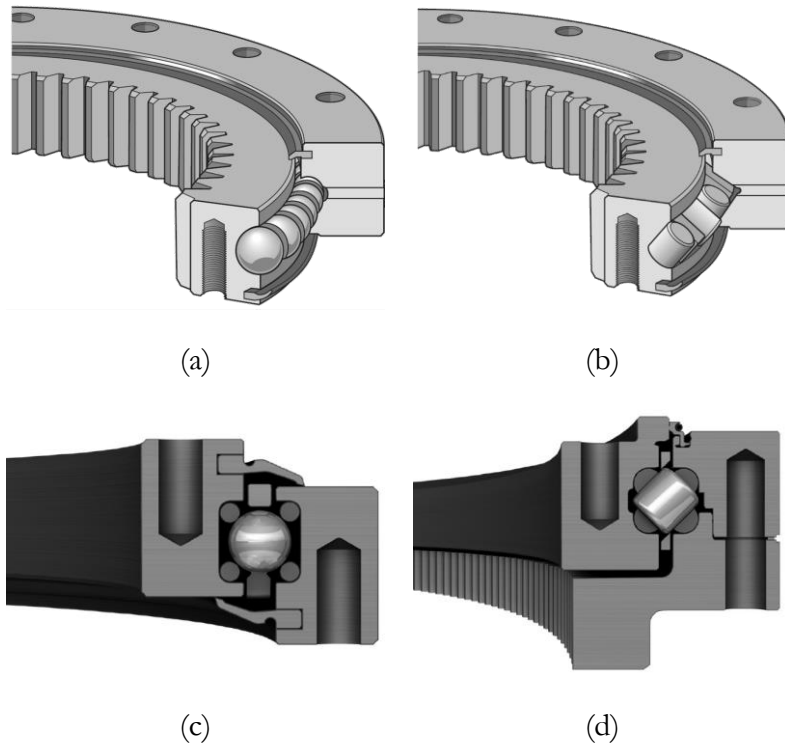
Slewing bearing types: (a) Four-point contact [23]; (b) Crossed roller [23]; (c) Four-point contact wire-race [2]; (d) Crossed roller wire-race [2].
